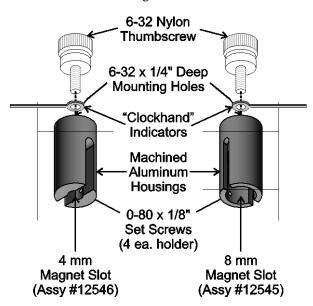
Four millimeter magnet holder (part #12546; left) and 8 mm magnet holder (part #12545; right). 0.44" dia. x 0.88" tall (11 mm x 22 mm) outside dimensions; actual size).
